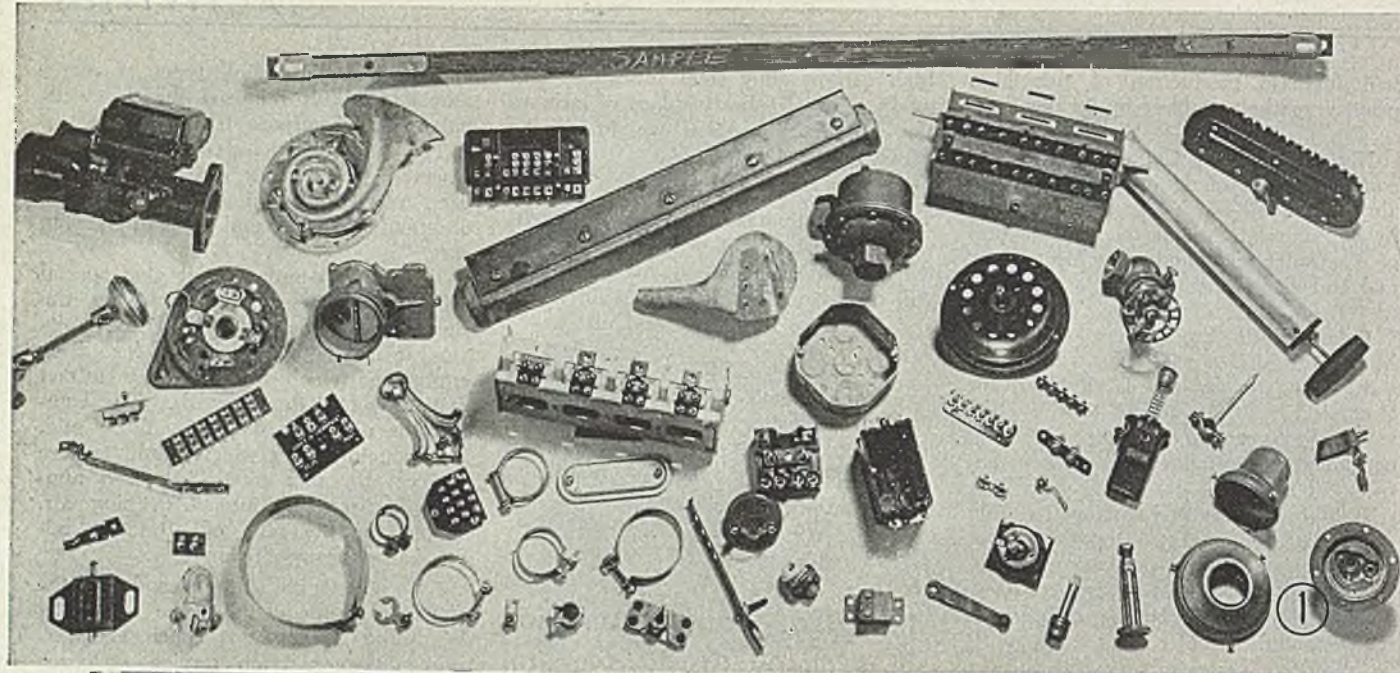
Great scope of automatic assembling equipment is indicated here where elements assembled include castings; die castings; sheet steel, copper and brass stampings; spring brass; plastics and the like. Also note range in size. Detroit Power Screwdriver Co. supplied photos
